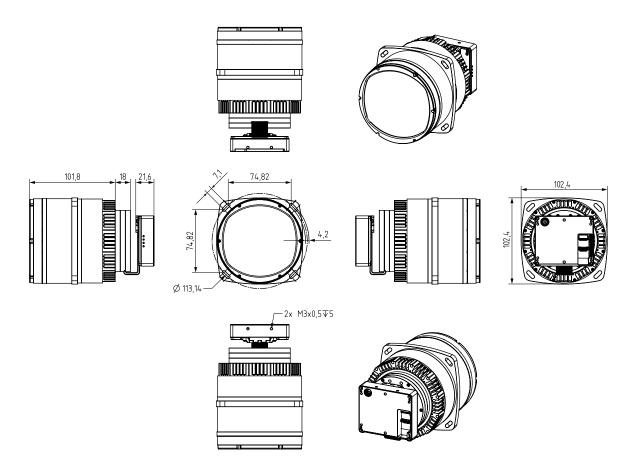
Dimensional drawing of MX610XR-SY-TP2:1-G0/-CSI with detached sensor sub-assembly
